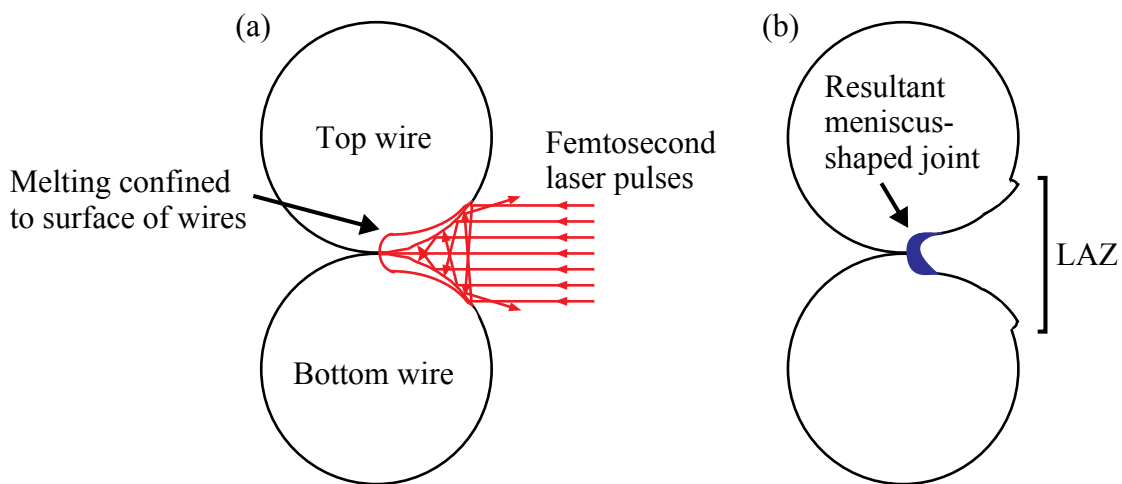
Focus beam joining mechanism for the microwelding of Au crossed-wires. (a) Laser irradiation directed to contact point of X-loop. (b) Molten material remains in cavity to form the joint after femtosecond laser irradiation.
